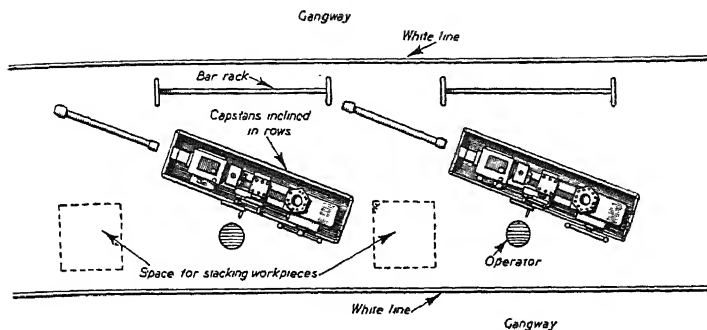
Suggested layout for a capstan or turret lathe shop.
